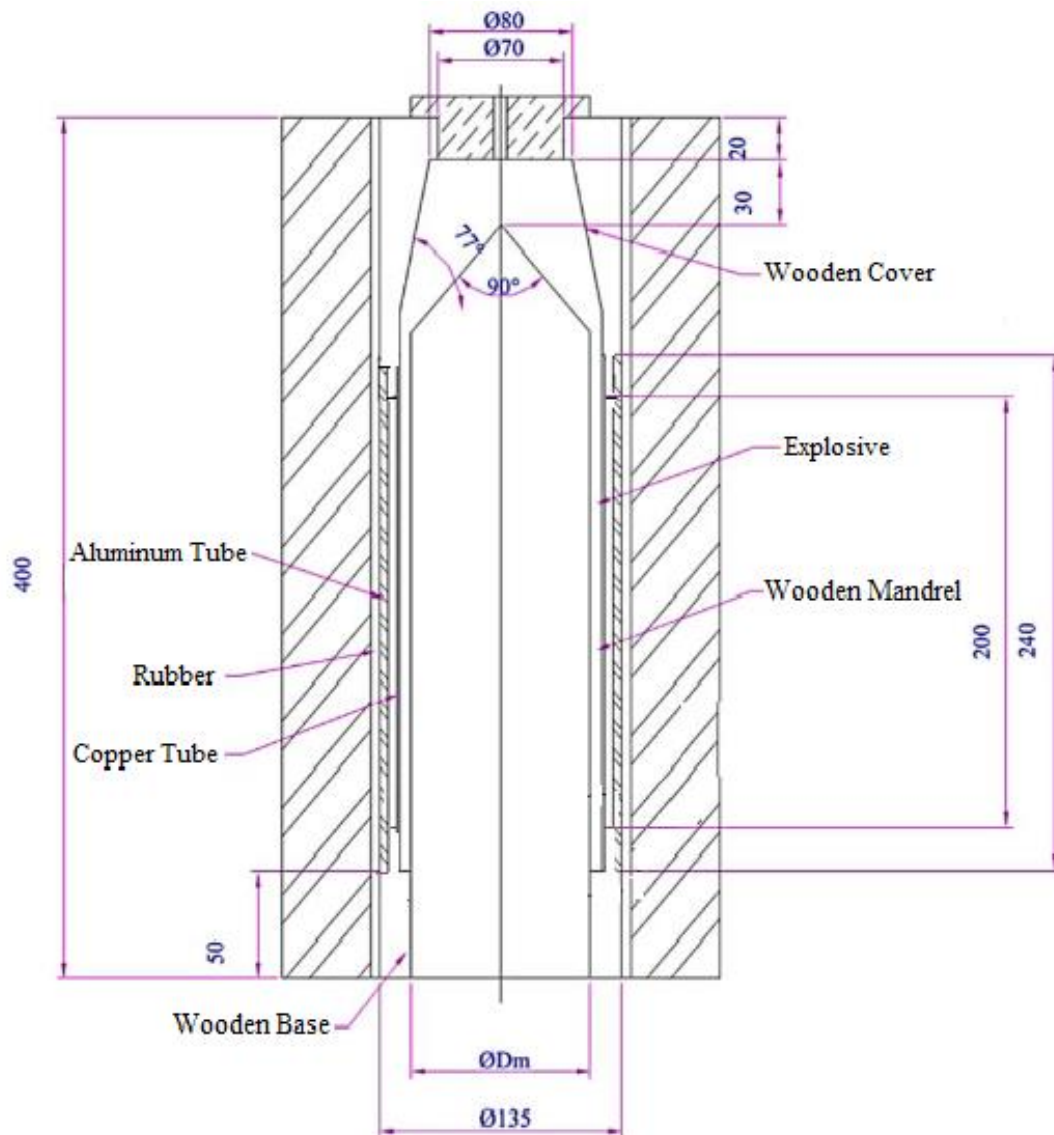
Set-up of tubes and explosive welding equipment.
